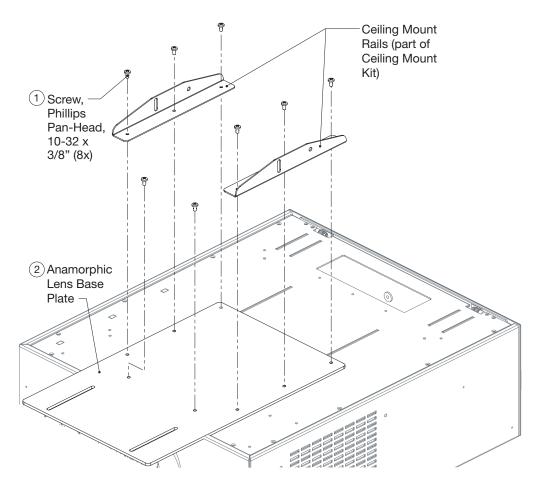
Projector with Cylindrical Lens Base Plate and Ceiling Mounting Rails - Exploded View
